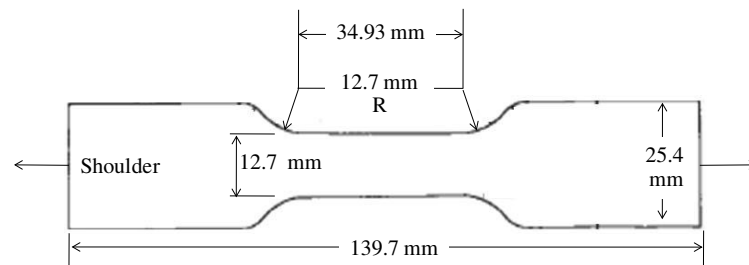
Typical tensile specimen, showing a reduced gage section and enlarged shoulders (ASTM D 3574 Test E).
